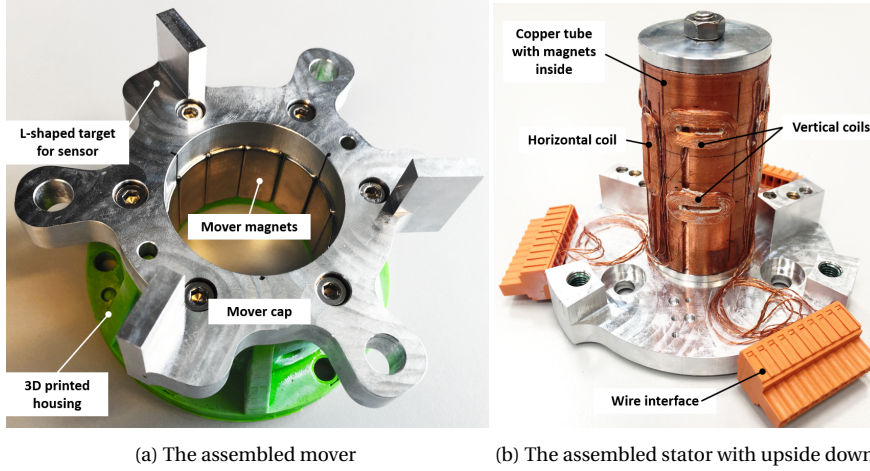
The assembled mover and stator. The mover consists of a 3D printed housing, magnets, mover cap and L-shaped sensor target. The cap is CNC machined to make sure the position accuracy of the sensor target and the surface quality for the sensor. The stator consists of the base to mount to the robot arm, copper tube for heat transfer and holding the stator magnets and coils. The coils are glued manually on the copper tube with thermal glue. (Figure courtesy of Yanyang Wang [45])
